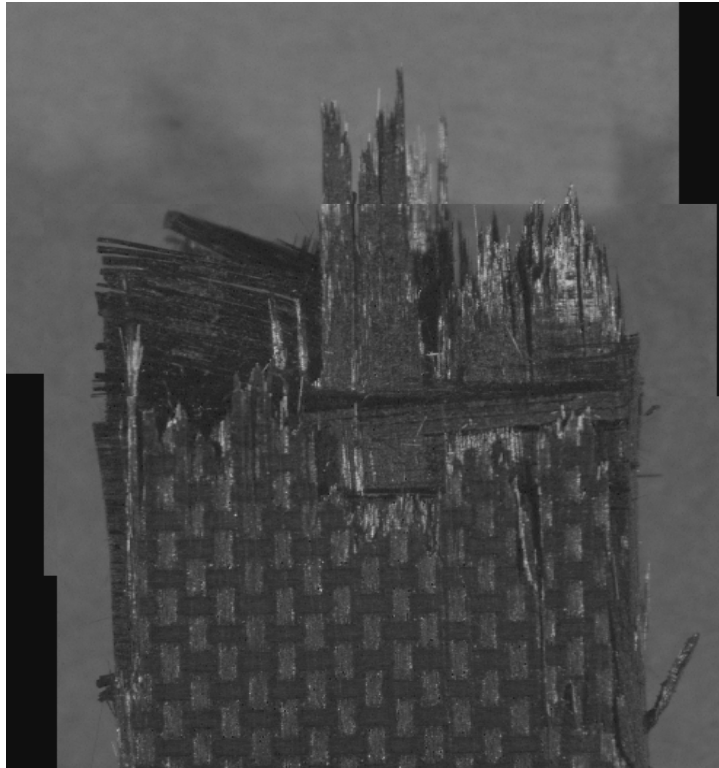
the bottom right side of the [0/90] IM7/ BMI 5250-4 specimen showing a close up view of the fiber fracture and pull out when subjected to tensile load to failure at 191°C
